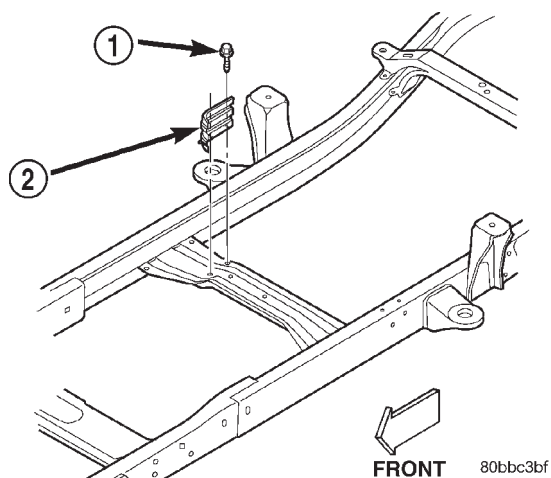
Center Bearing Heat Shield—Standard Cab and Extended Cab
